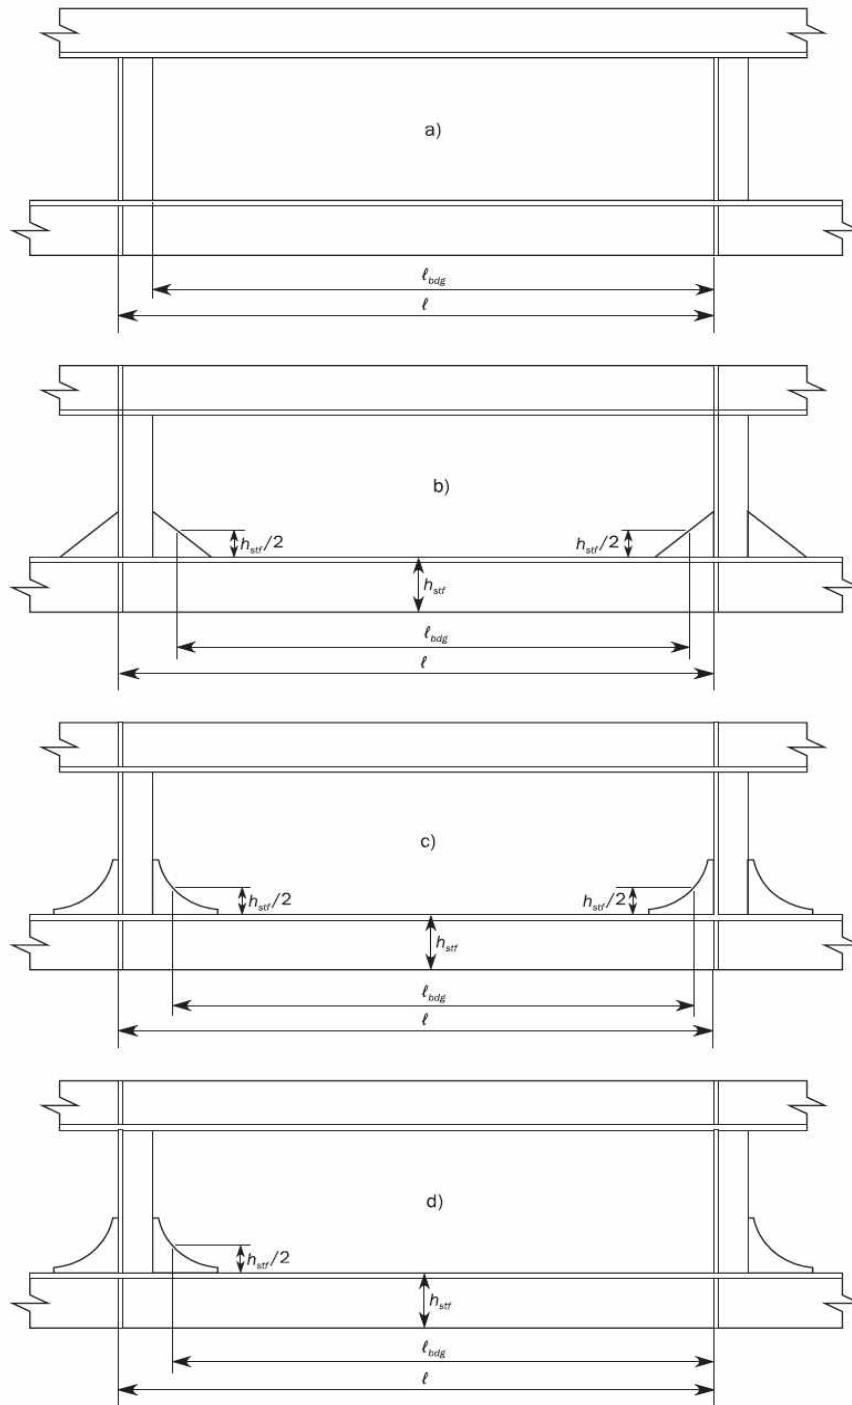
Effective bending span of stiffeners supported by web stiffeners (Double skin construction)
